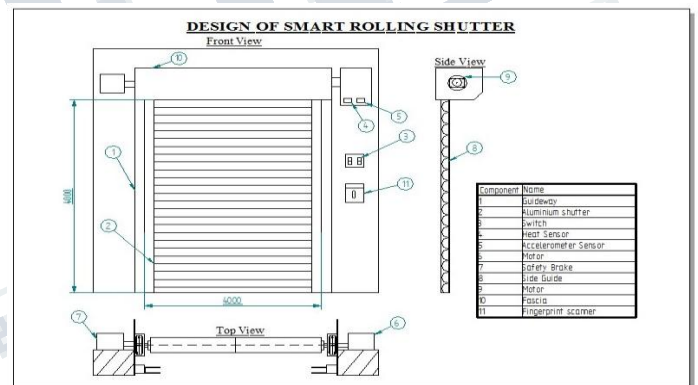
CAD Model of Smart Rolling Shutter Opening System
